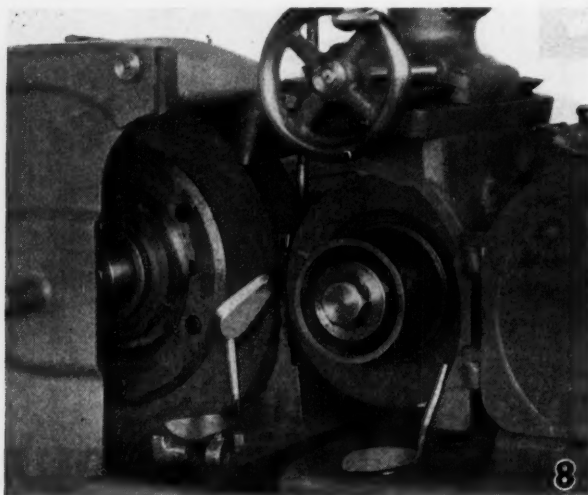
Golf club heads, both out-of-balance and tapered, are being finished with this machine. Approximately .025 inch of stock is removed and the pieces are finished at a rate of 250 per hour.
